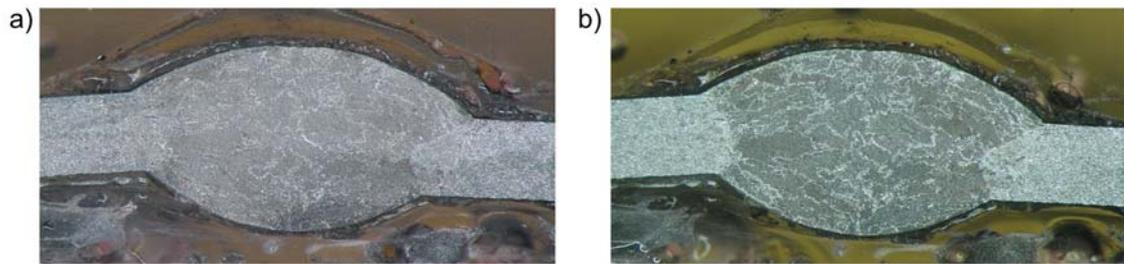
Macrostructure of trial joint made for 0.8 mm thick sheet welded with standard MAG program: after etching (a), and after oil application (b)
